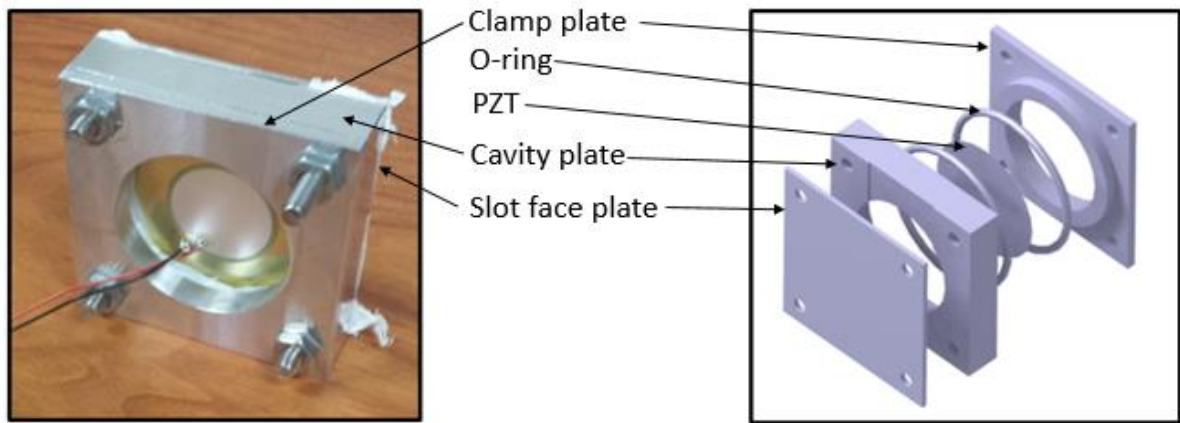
Assembled SJA (left) and exploded view of SJA (right).
